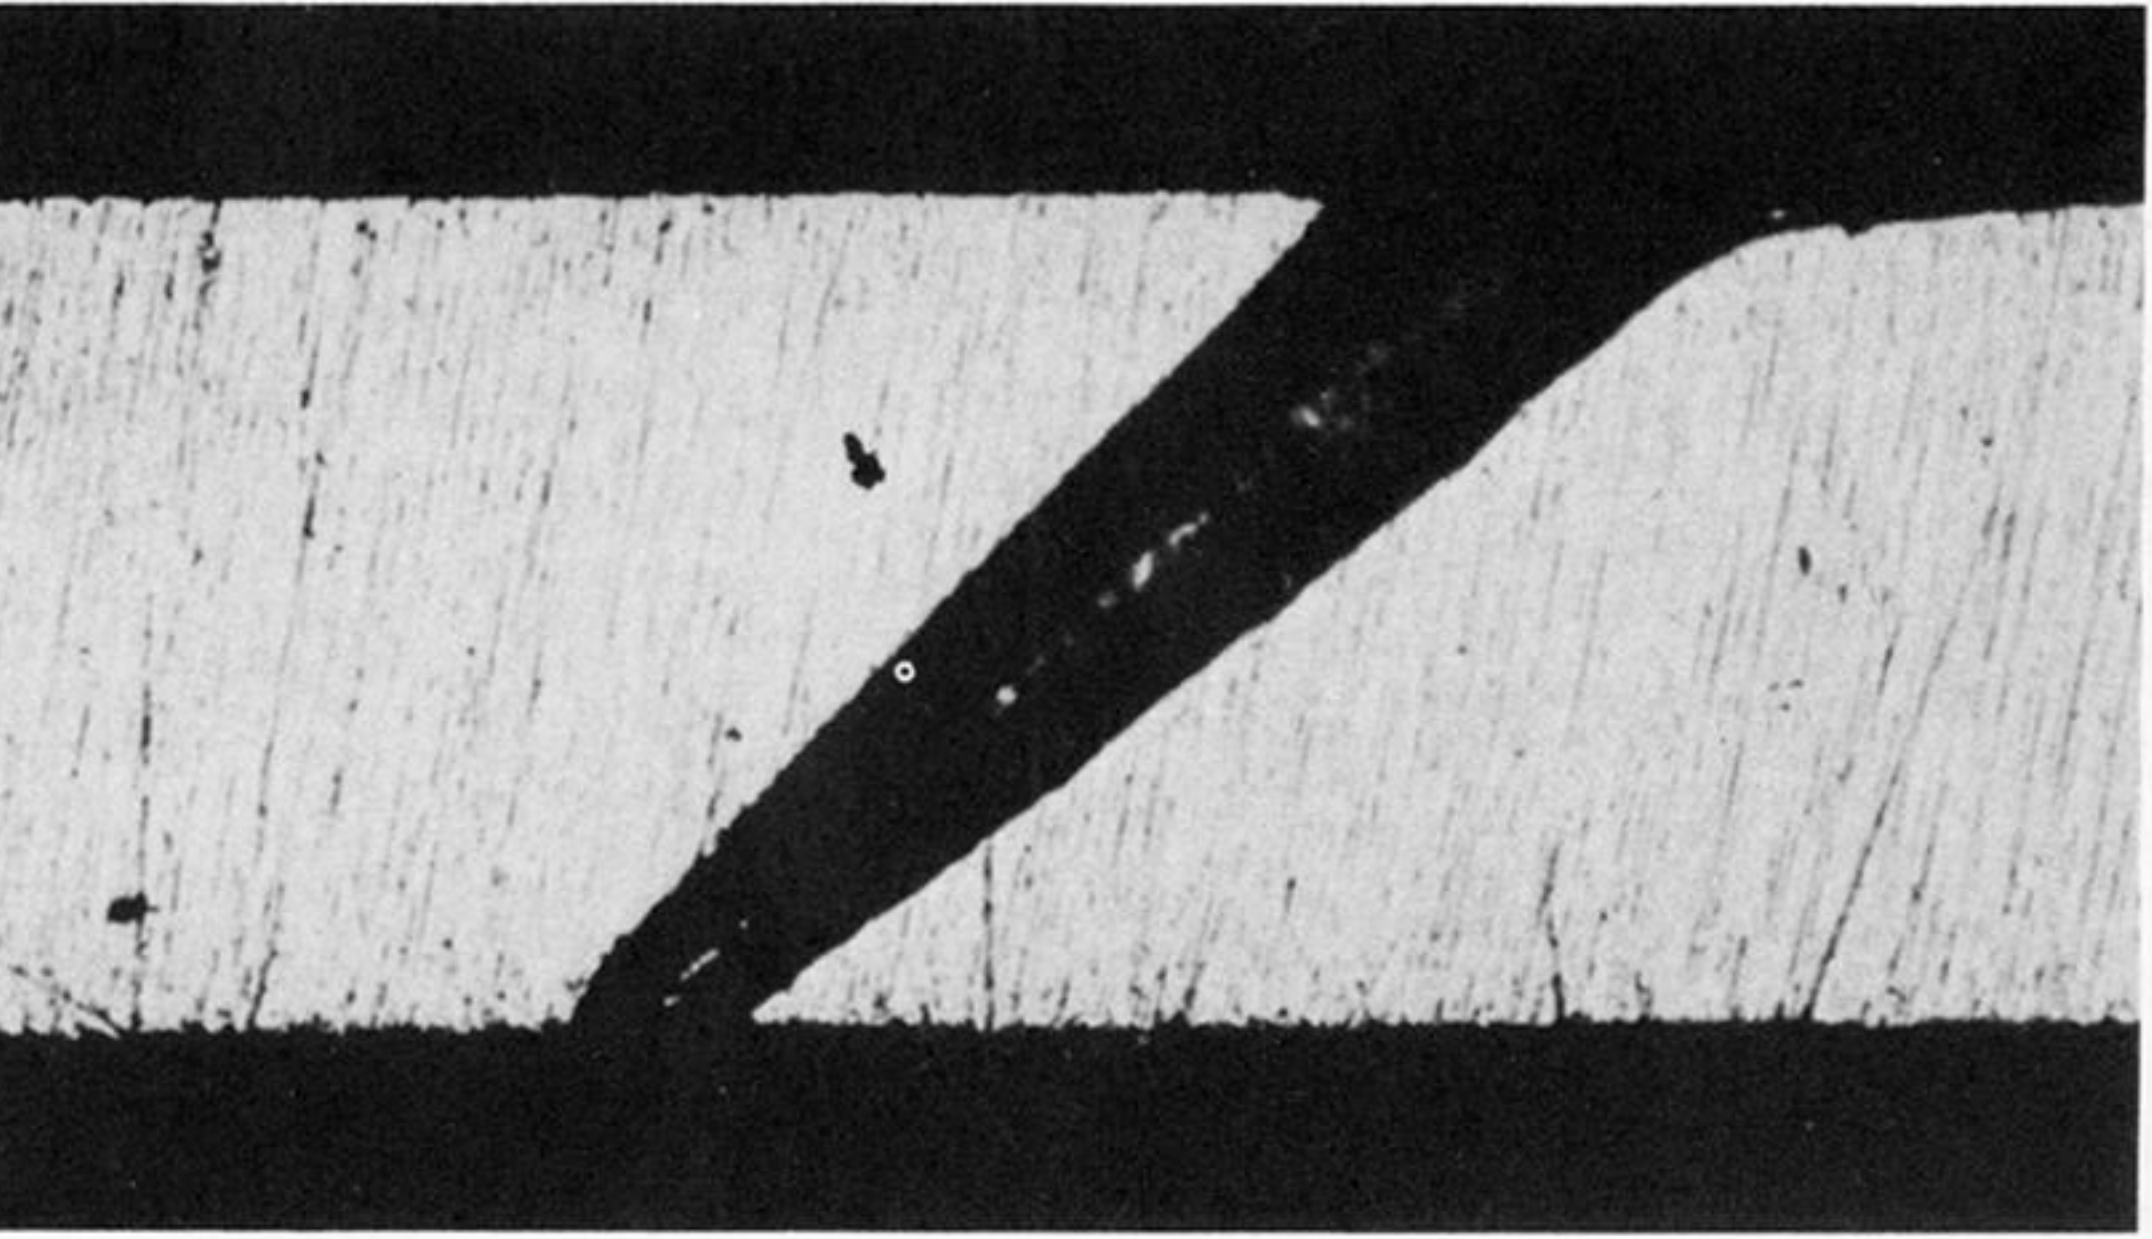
Cross section of hole drilled by electrojet at 45° angle.
